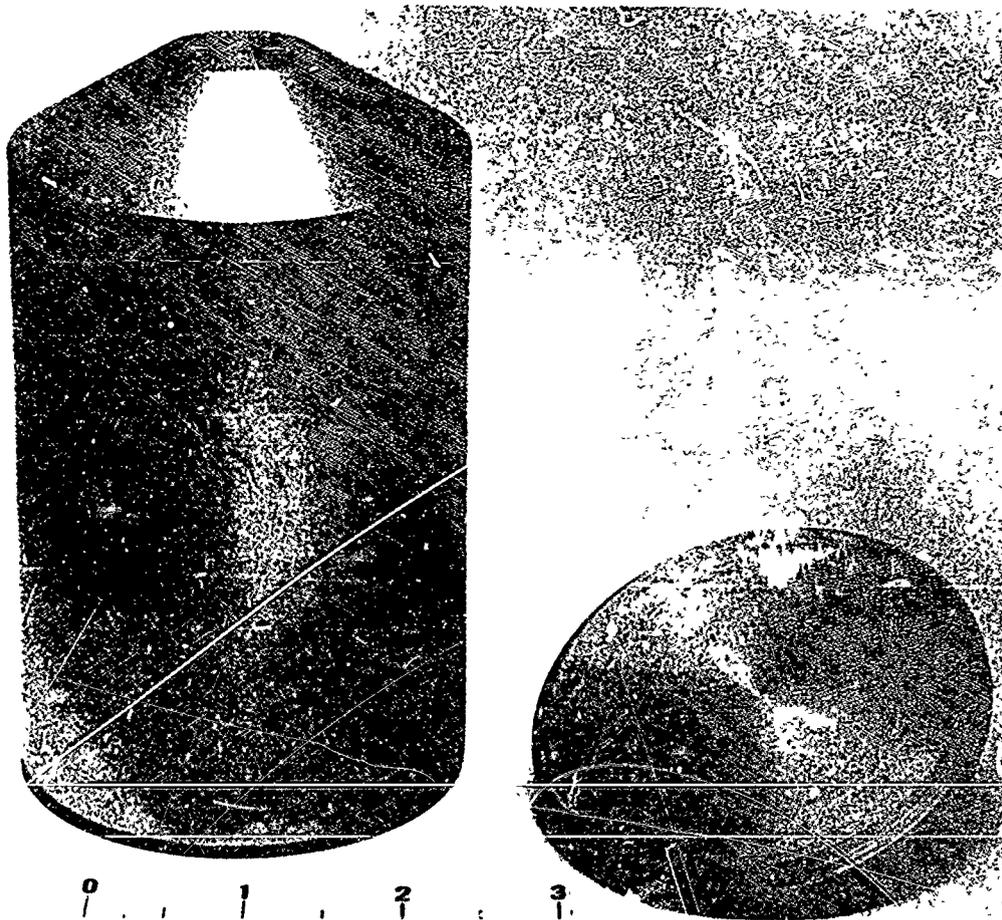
Typical Finished Machined Mo-0.5%Ti Can and Cap within which the Centrifugal Cast 68W-20Ta-12Mo Billets were Sealed and Extruded.
